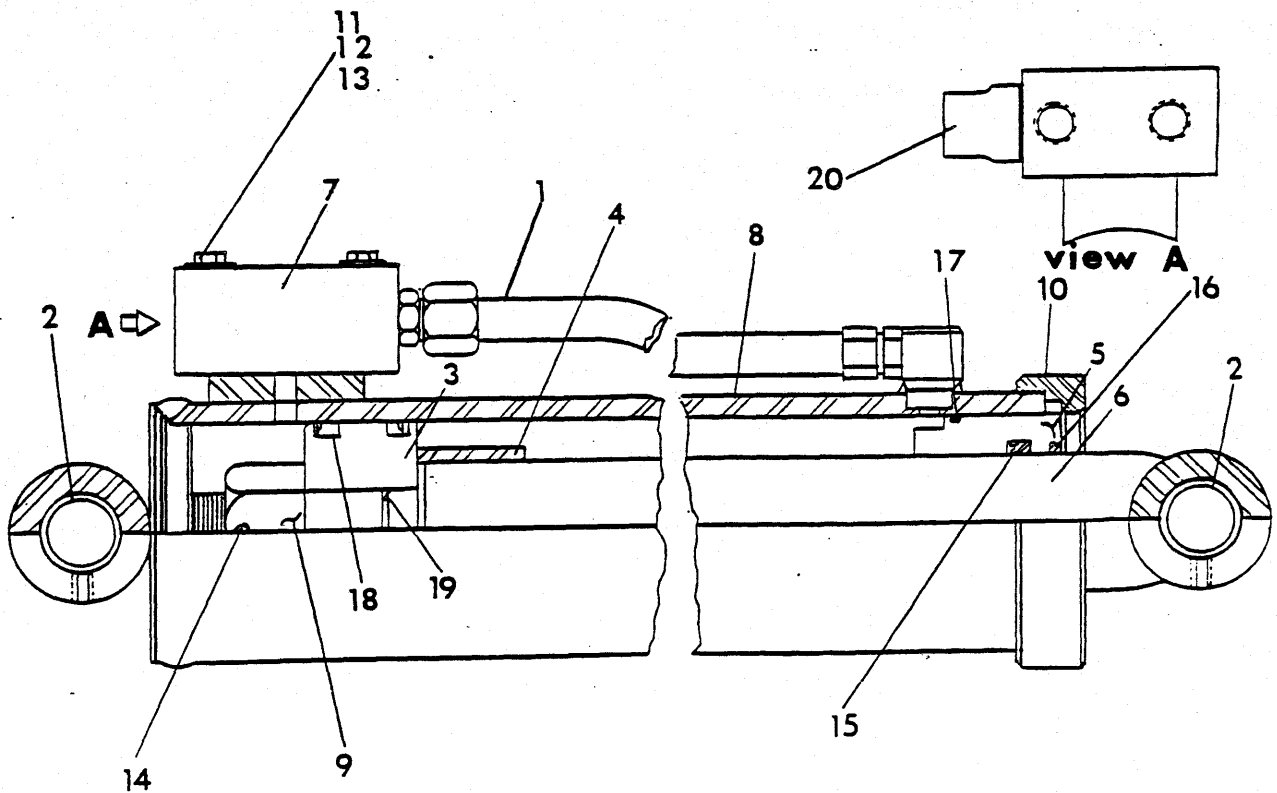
B TOPPING CYLINDER, PARTS BREAKDOWN (58,68)
